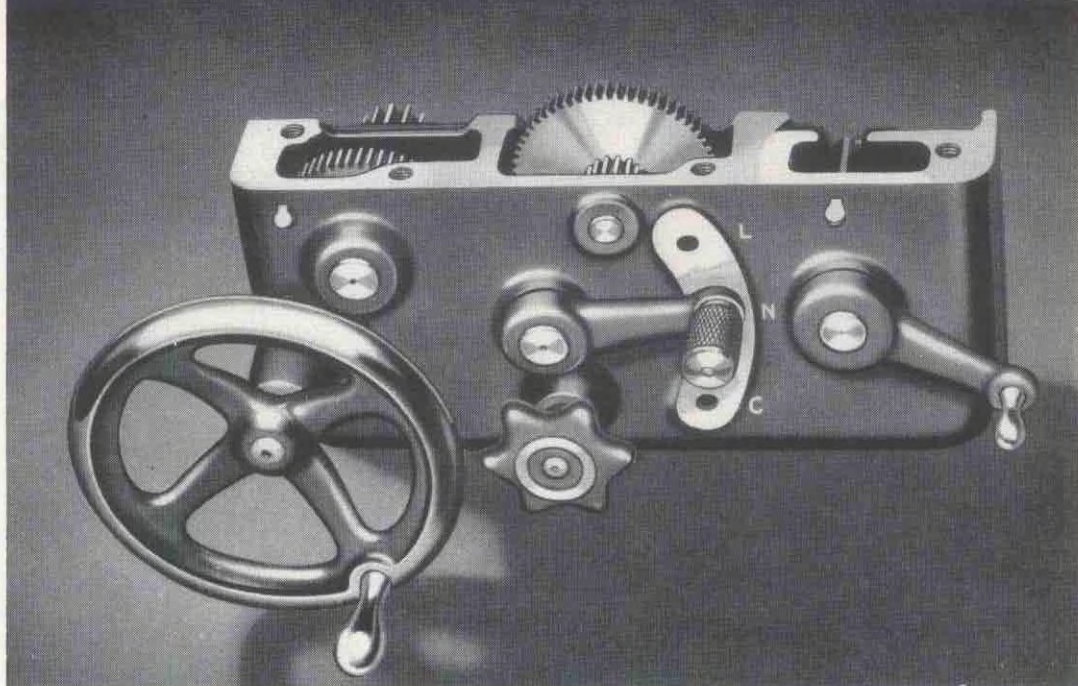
Front View of Double Wall Apron Showing Rigid Box Type Construction
